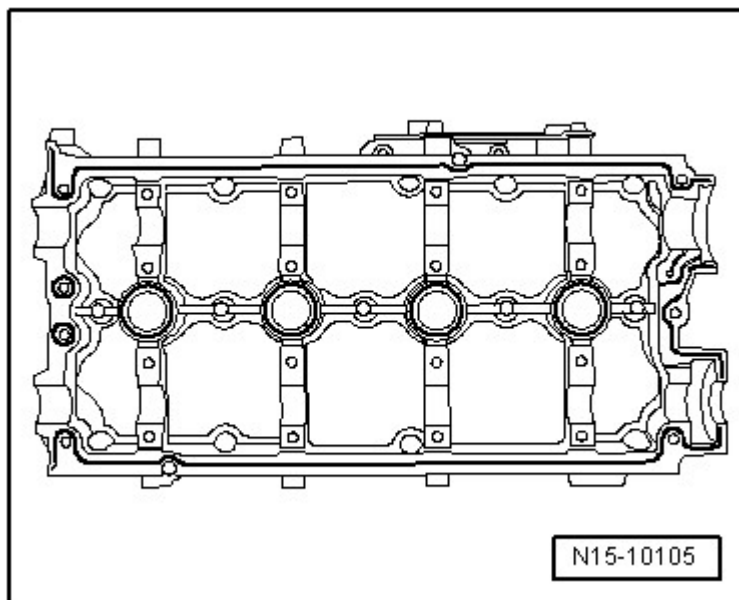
Identifying Old Sealant On Guide Frame Groove And From Sealing Surfaces
